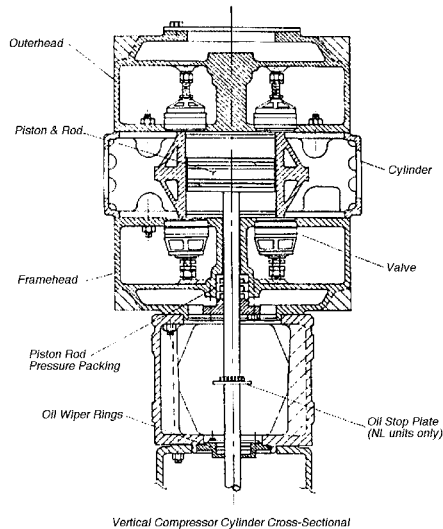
Cylinder arrangement with suction and discharge valves located in the cylinder heads.
